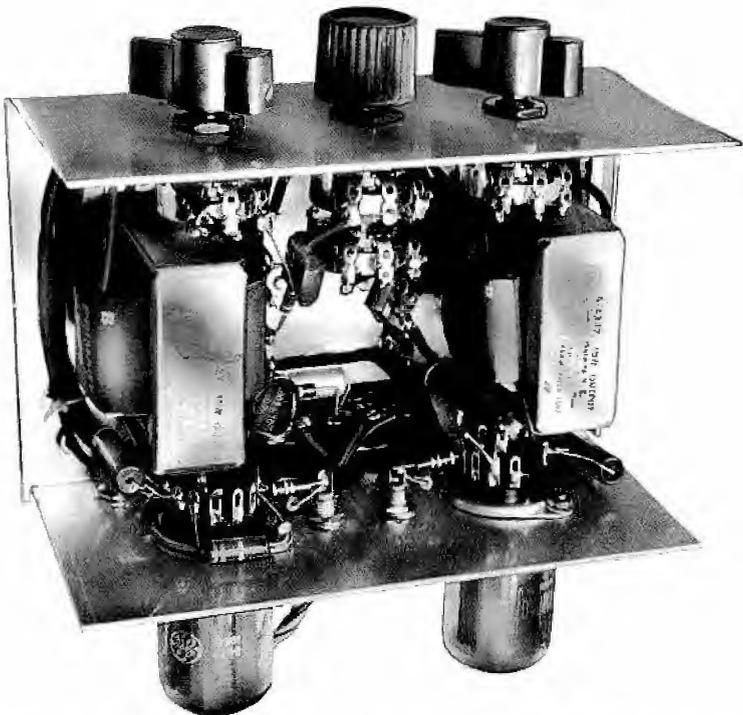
Under-chassis view of stereo amplifier showing orientation of parts and tube sockets
